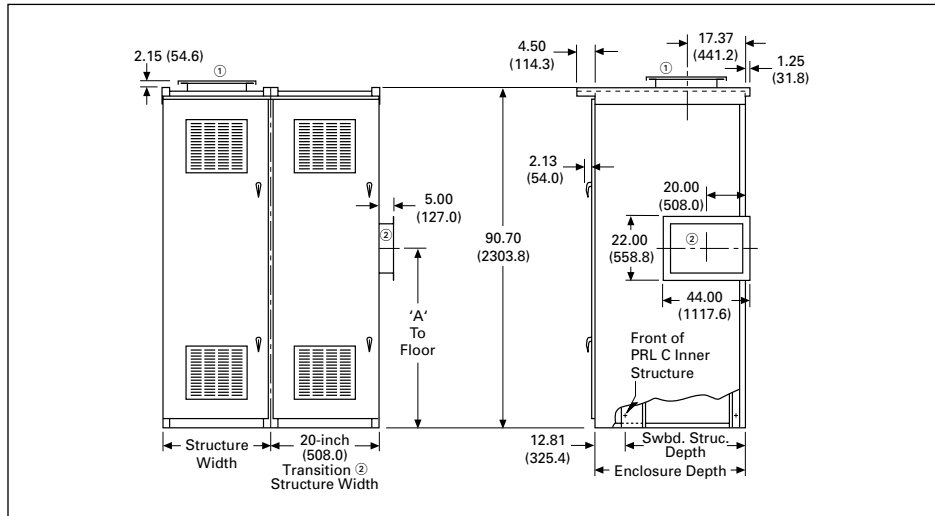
Front or Rear Access—Non-Walk-in with Flat Roof—Dimensions in Inches (mm)
